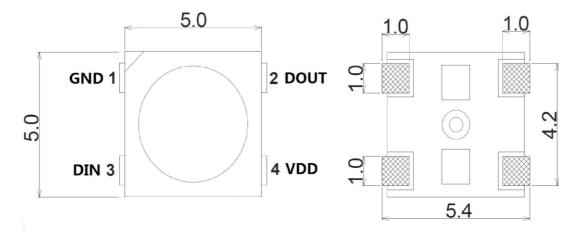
IN-PI55TAT(X)R(X)G(X)B Package Outline Dimensions
